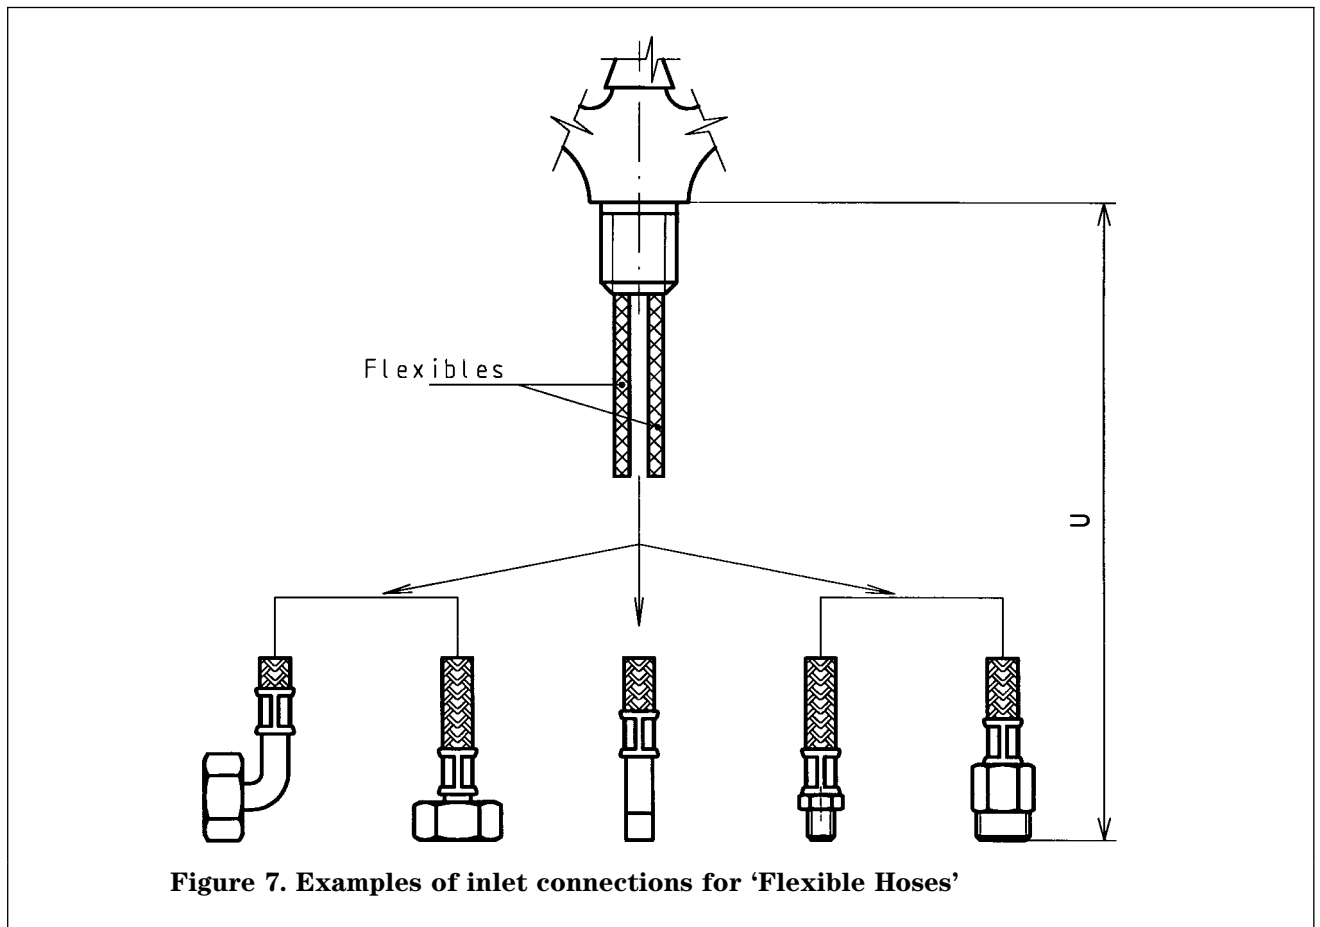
Examples of inlet connections for 'Flexible Hoses'
